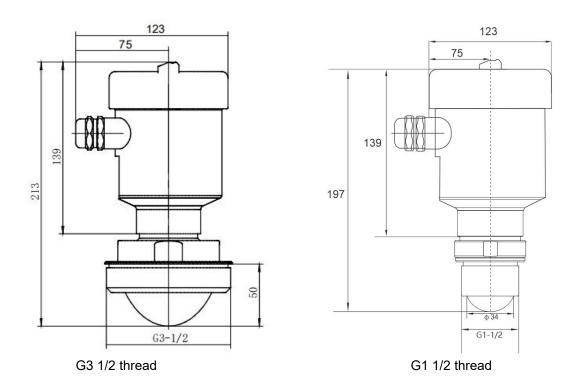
Dimensional Drawing of Standard Temperature Threaded Connection Structure (Unit: mm)
